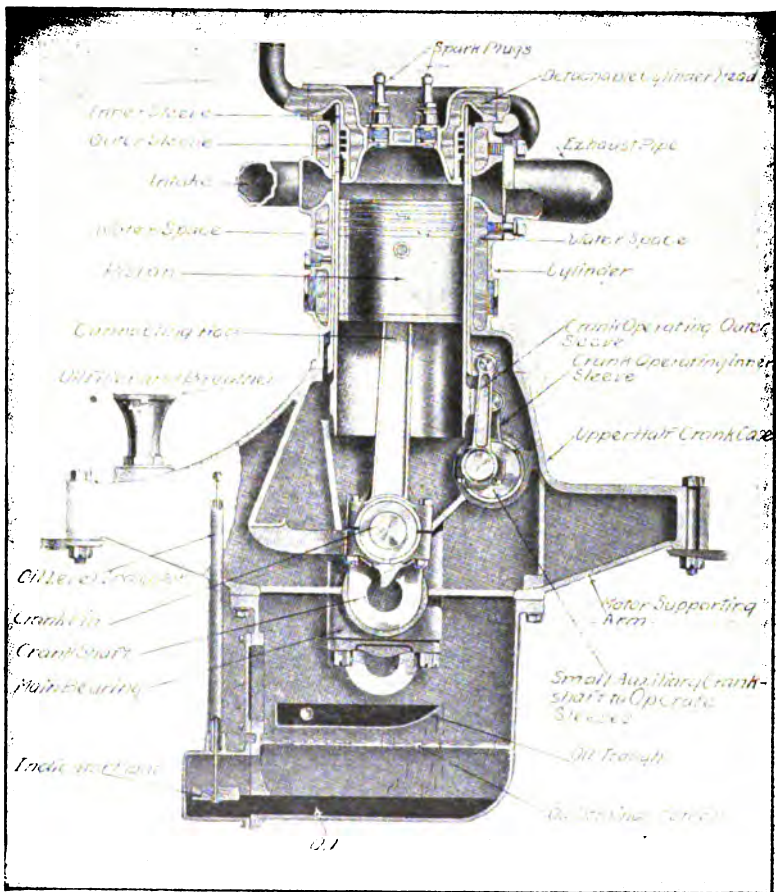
End section of Knight engine, showing sliding sleeves which replace poppet valves for controlling gas passages.
